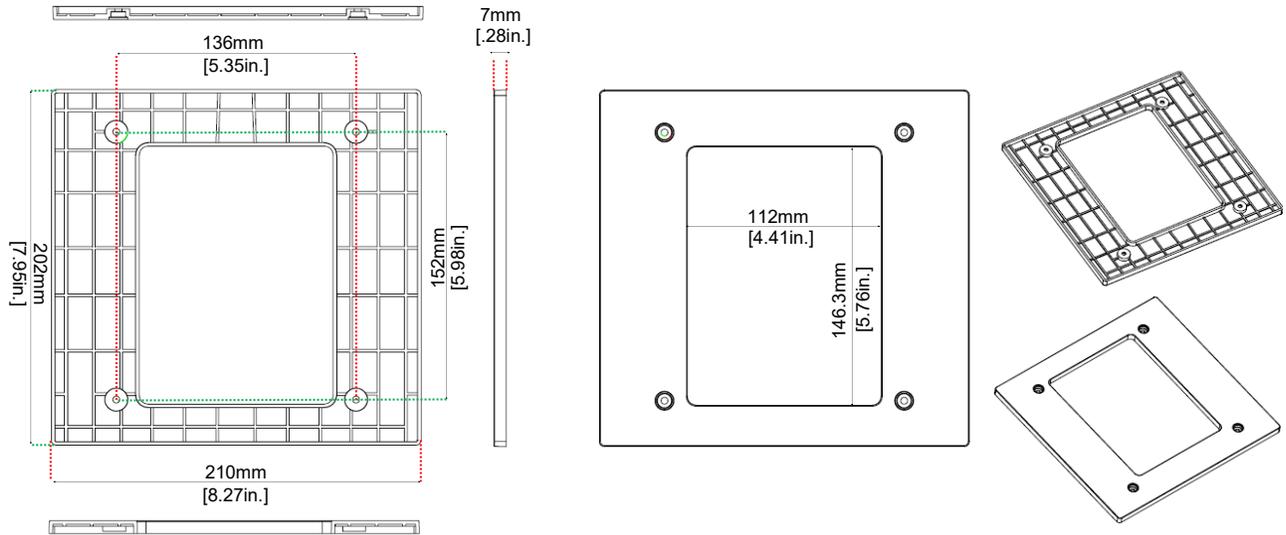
APV3-BDA - Flush Mount Front Plate Dimensions
